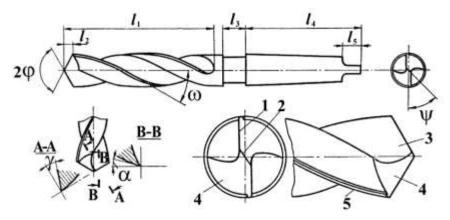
Parts and elements of twist drill: l₁- body; l₂- lip; l₃- neck; l₄-shank; l₅- tang; 1-main cutting edge; 2-cross cutting edge; 3-top rake; 4-back rake
